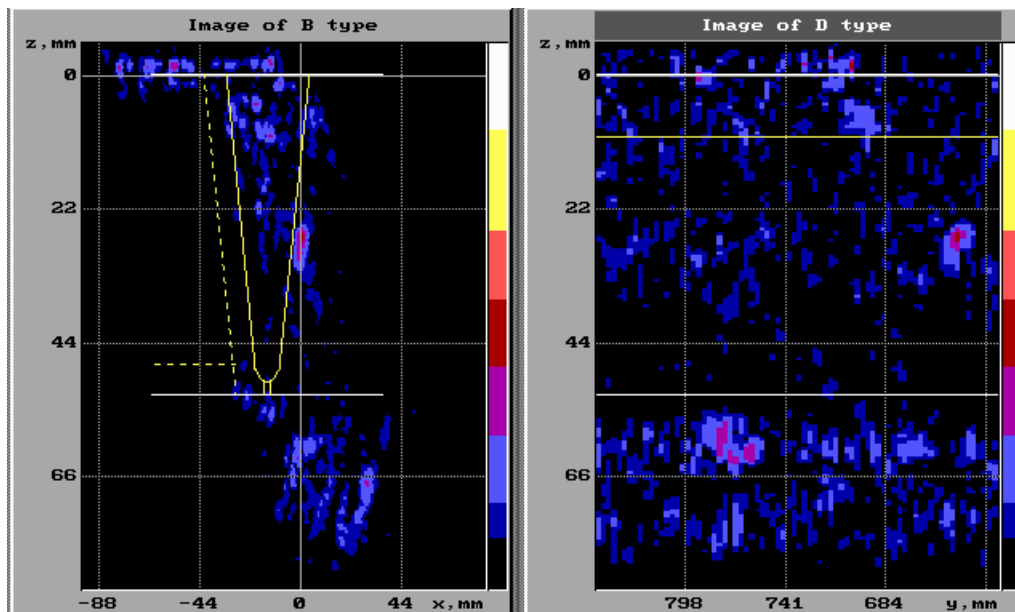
Acoustic holography reconstruction B- and D-scan images for defects in an Inconel weld.
